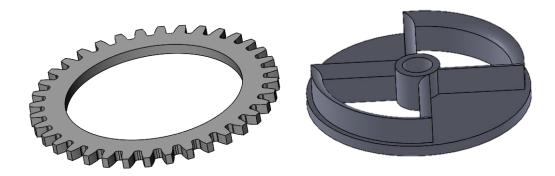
Large inner diameter gear (Left) and the food wheel model (Right) that we combined to make our complete food wheel
